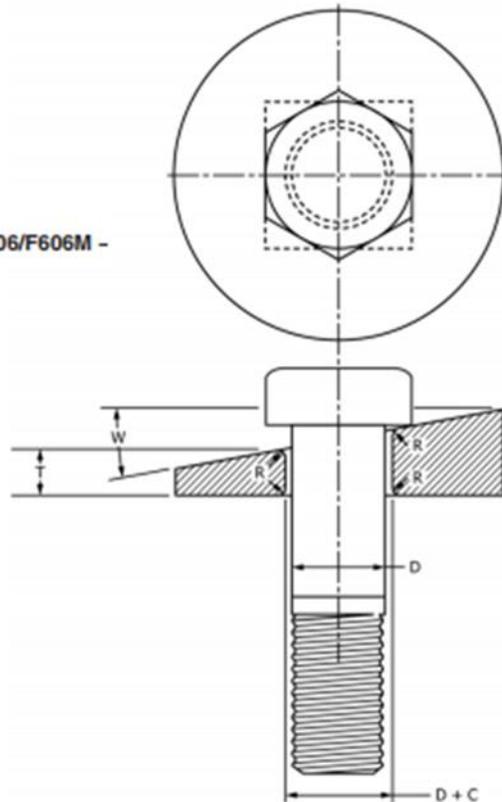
Tension Testing of Full-Size Bolt (Typical Set-Up)
